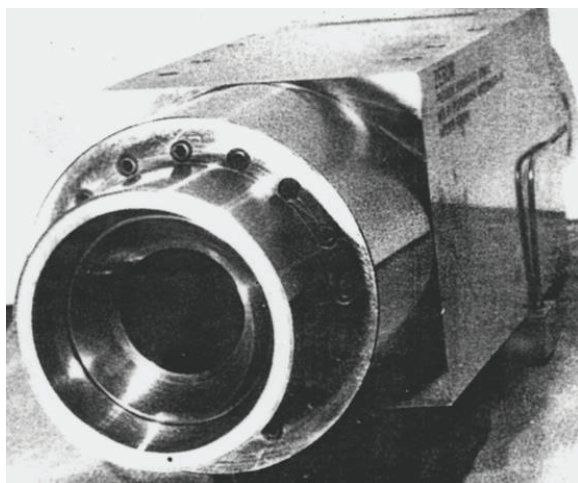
A Zeron stator showing the front hemispherical, step-compensated air bearing and its mounting arrangement.
